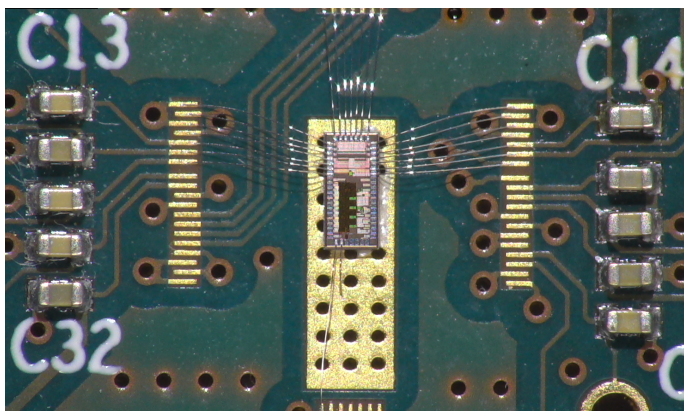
Silicon ASIC v1 mounted and wire-bonded on the PCB.
